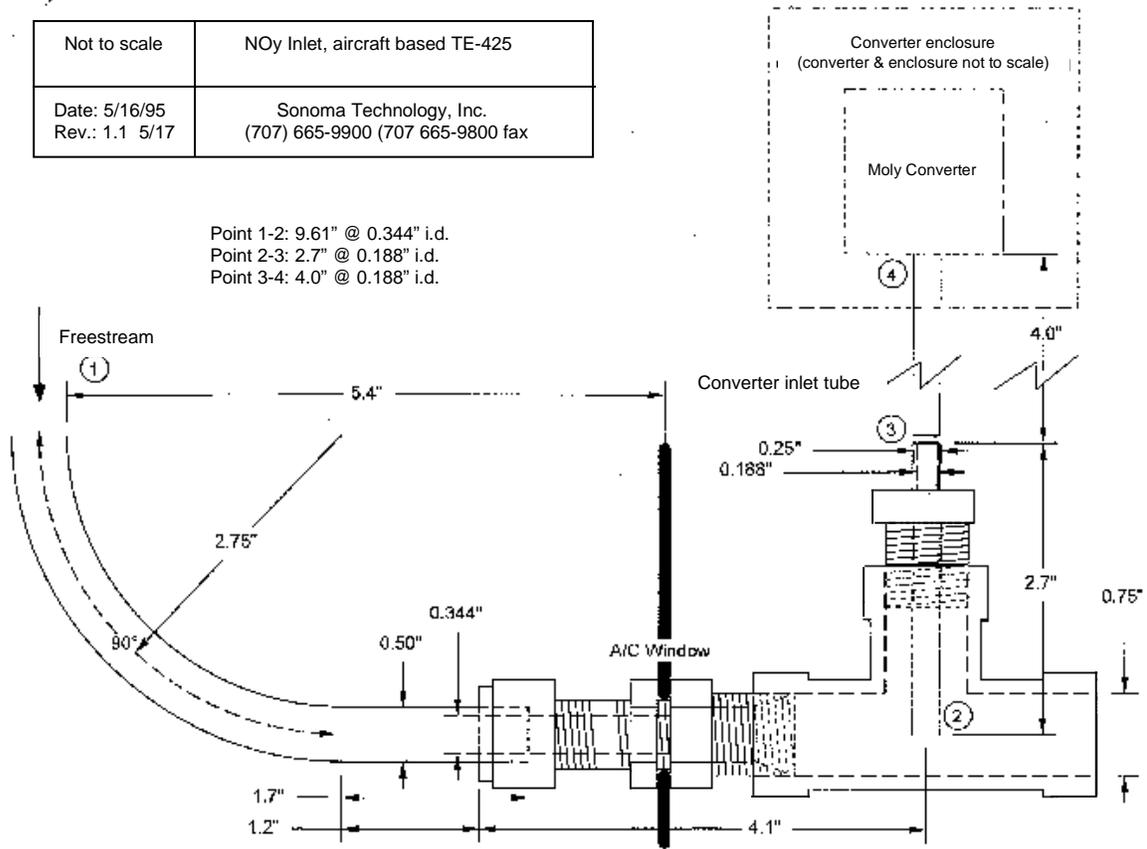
An engineering design drawing of the NO<sub>y</sub> inlet system used on the STI Aztec and Cessna 182.
